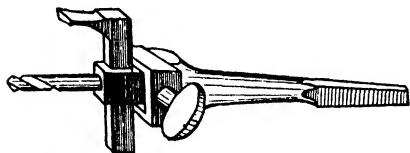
Expansion drill for cutting large circular holes in sheet metal
